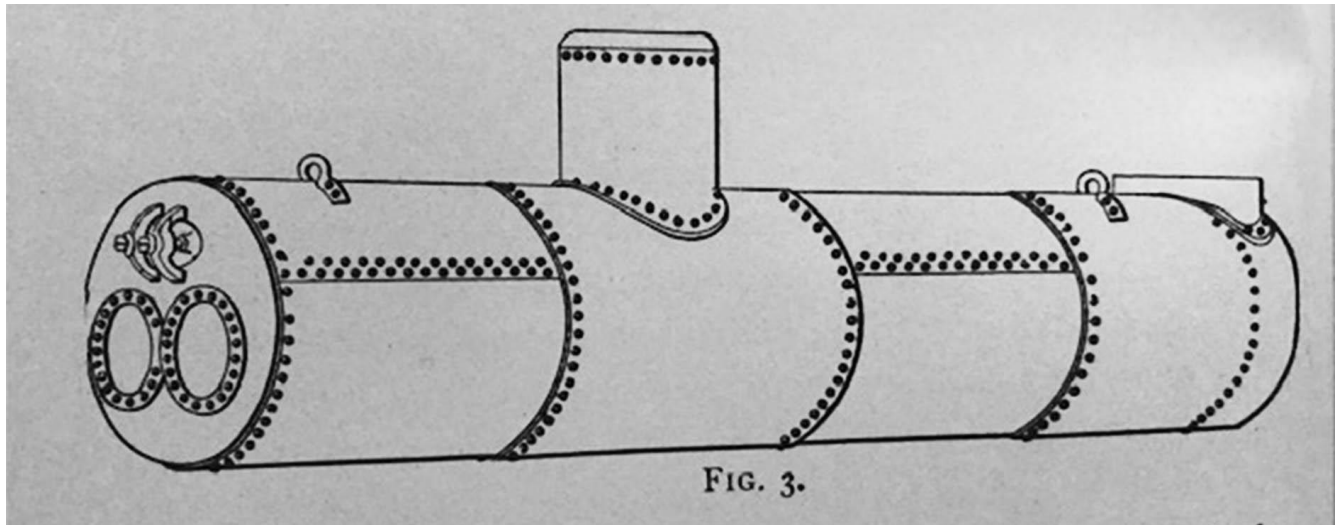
Cylindrical Two-Flue Boiler (Peabody and Miller 1910:6).
